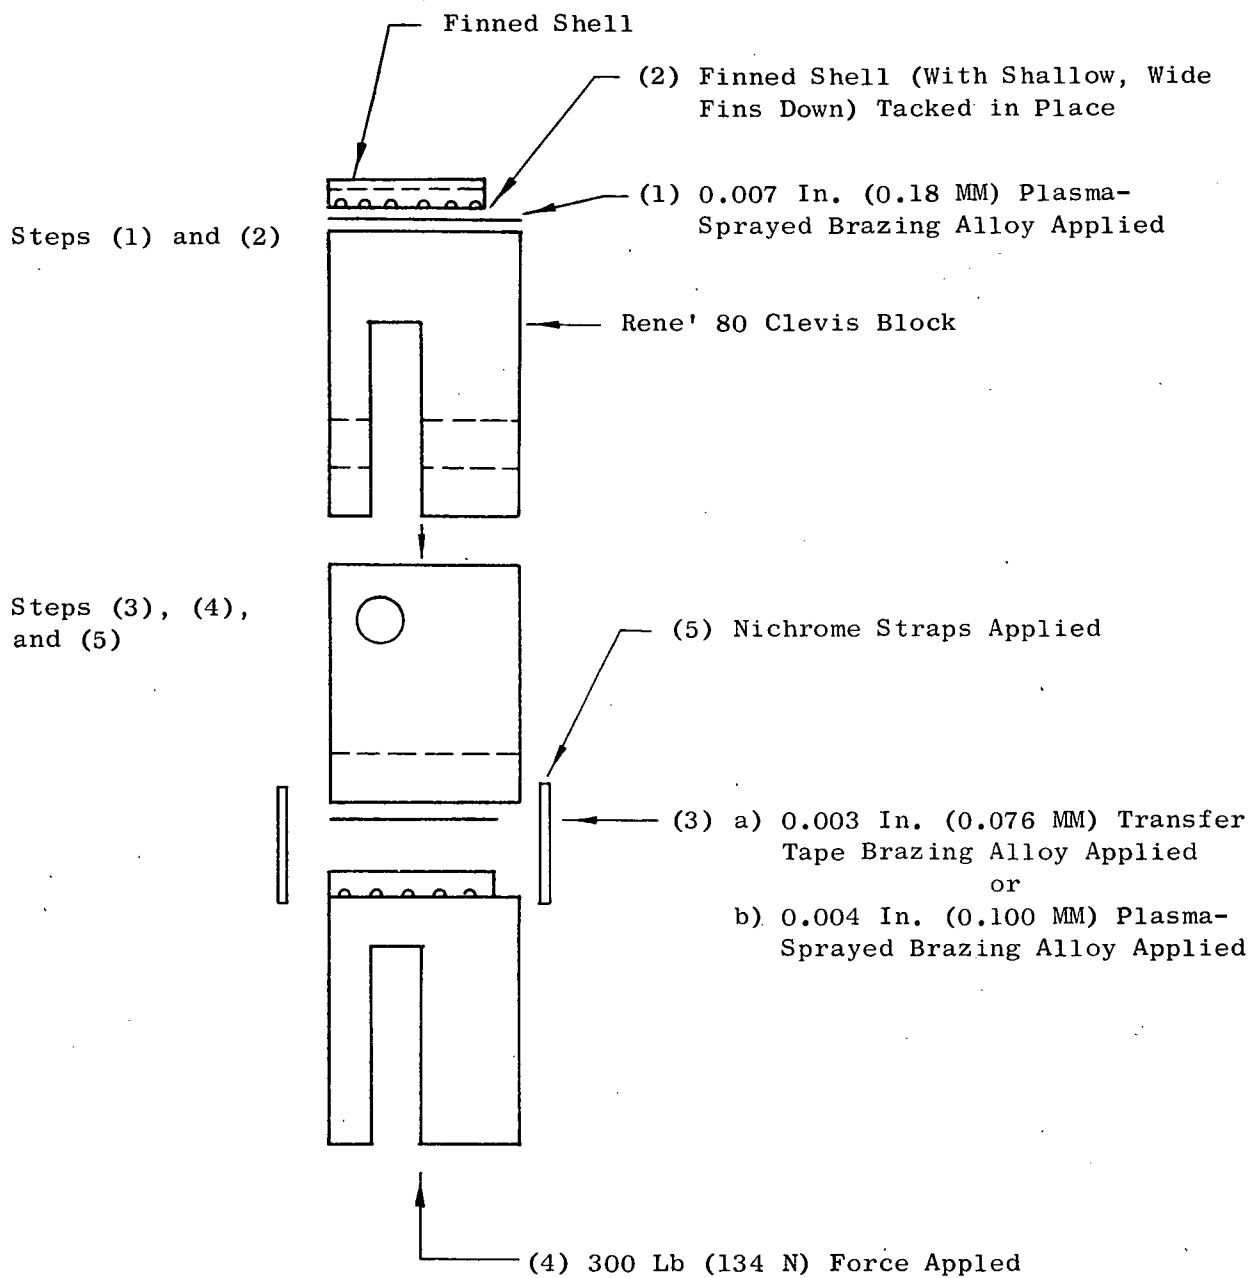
Techniques Used to Assemble a Short Transverse Finned Specimen.
